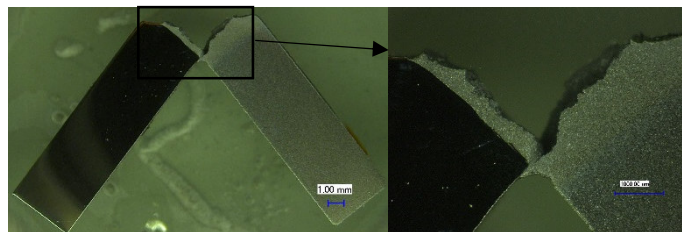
Cross-sectional view of the fractured AW samples after impact test which shows that the fracture occurred at AISI 1012 side.
